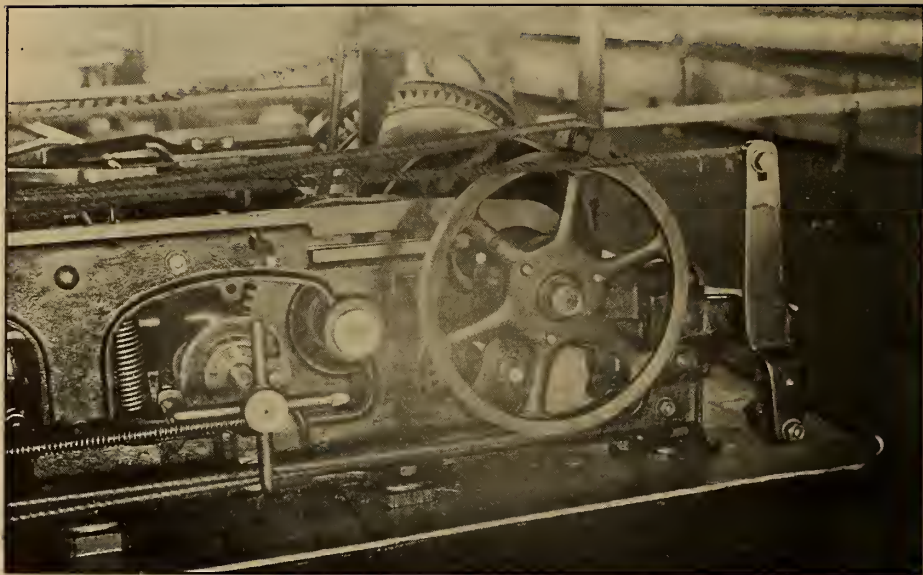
RIM PULLEY ON HEADSTOCK OF TWINER
